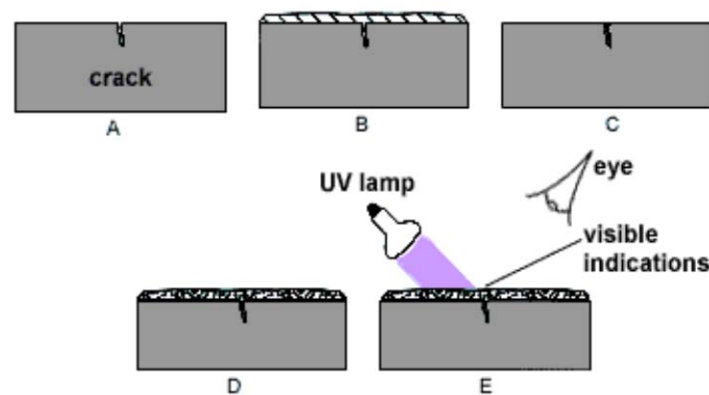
Steps of an inspection conducted by using liquid penetrant testing. (a) Sample before testing; (b) liquid penetrant applied; (c) surplus wiped off leaving penetrant in crack; (d) developer powder applied, dye soaks into powder; (e) View coloured indications, or UV lamp shows up fluorescent indications. (<http://www.twi.co.uk/content/ksijm001.html>)
